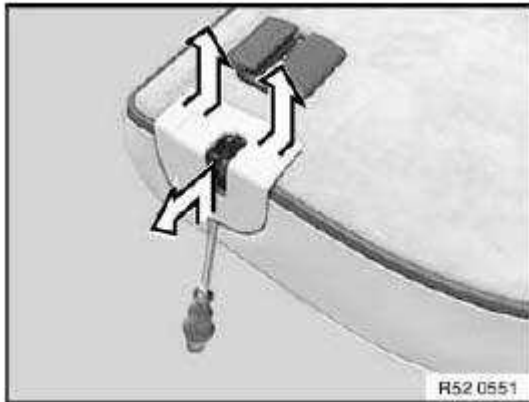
Sliding Lock Trim On Edge Of Backrest Side Upwards Slightly
